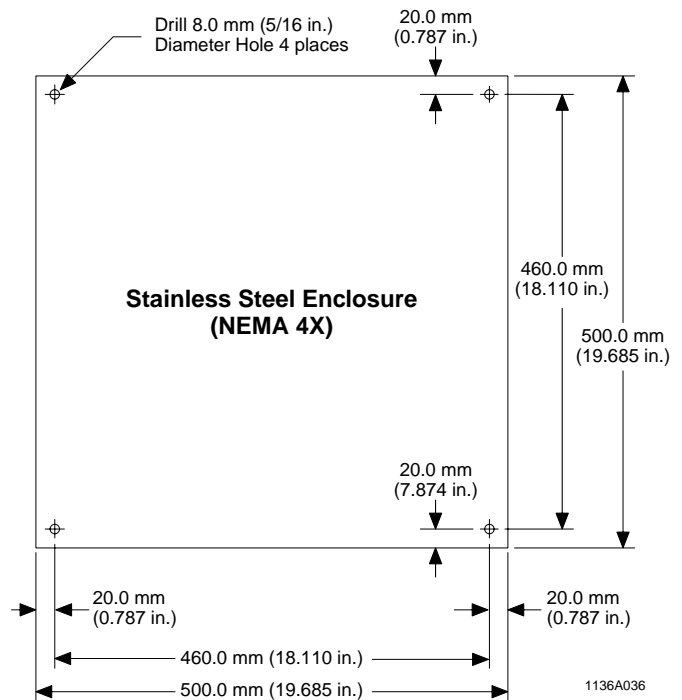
Mounting Dimensions for Stainless Steel Enclosures
